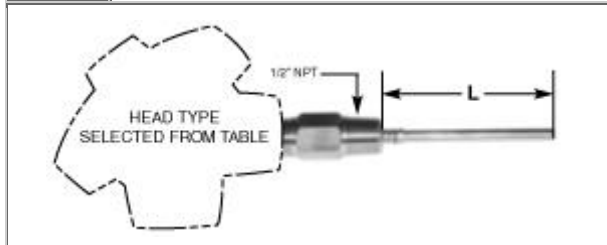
T/C Assembly w/ 1/2" NPT Spring Loaded Fitting
